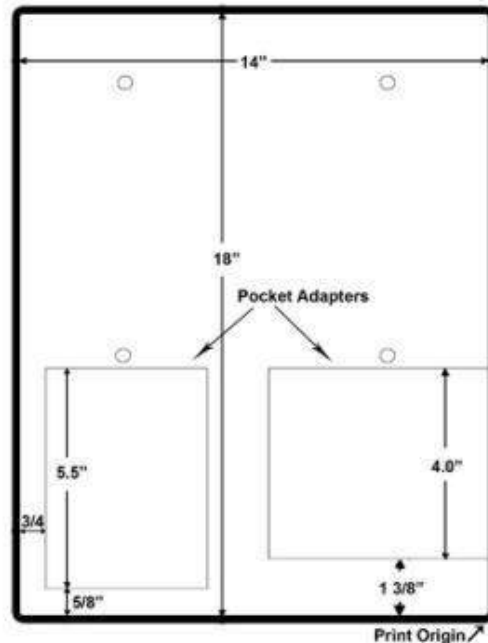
Print Table with Pocket Adapter Layout and Print Origin
